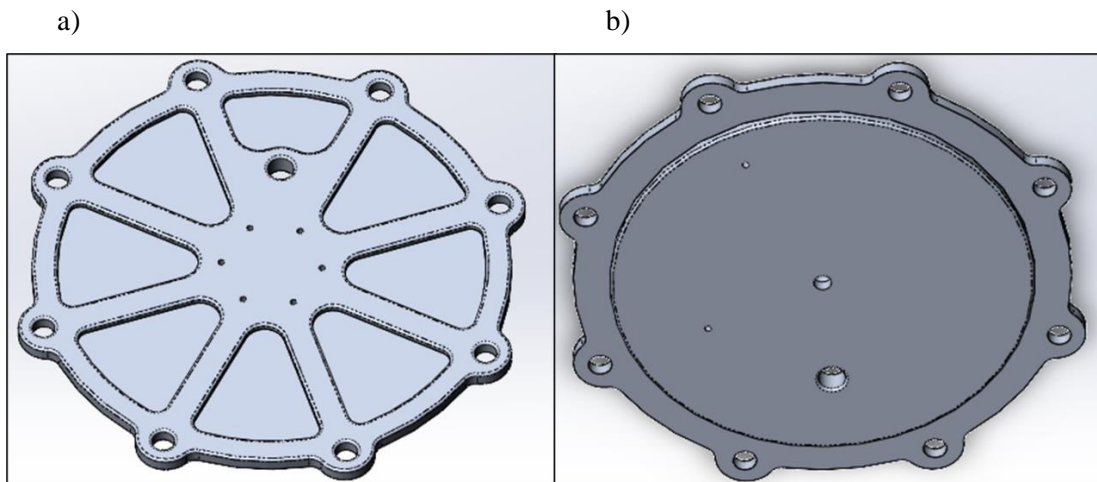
WCH lid final design: top surface (a); bottom surface (b)
